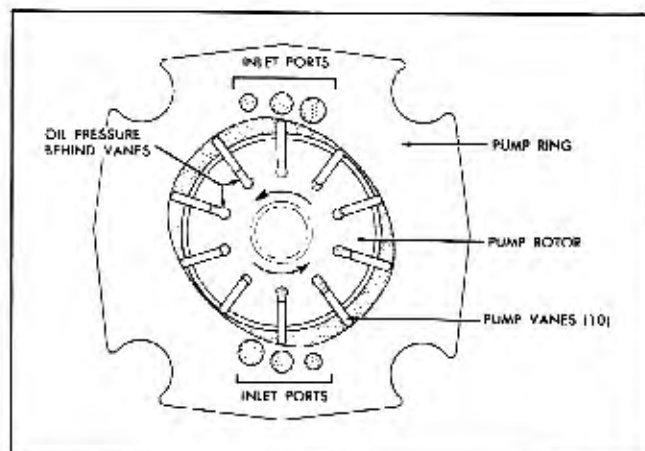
Oil Flow in Rotor and Vanes in Pump Ring
